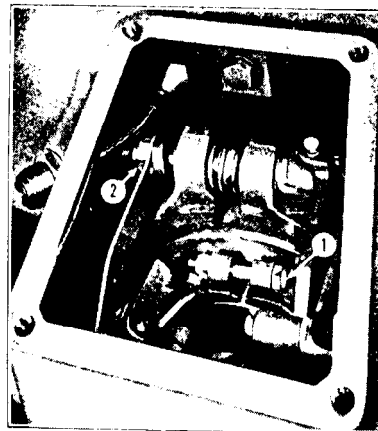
Capitol 1E Reverse Gear—Adjustments
